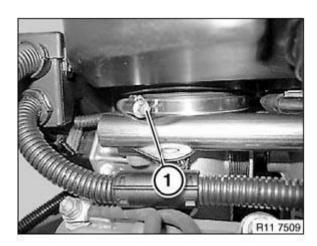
Identifying Hose Clamp On Cylinder 4 Courtesy of BMW OF NORTH AMERICA, INC.
